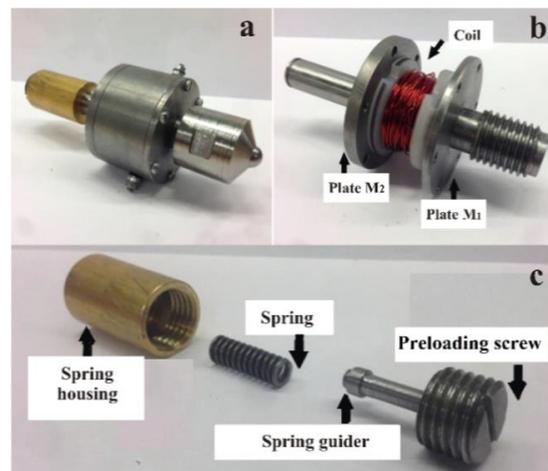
Ball-burnishing tool assisted with vibrations. (a) Compact tool. (b) Detail of coil that induces vibrations into the system. (c) Parts of the preloading system.
